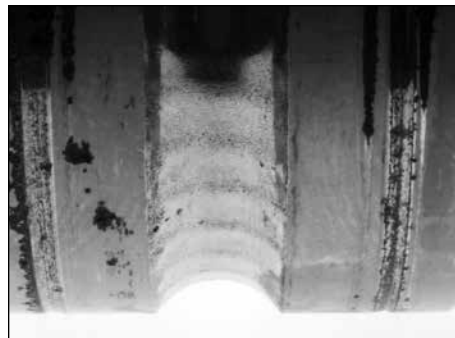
Note shock loading caused brinell damage on this ball bearing inner ring.
